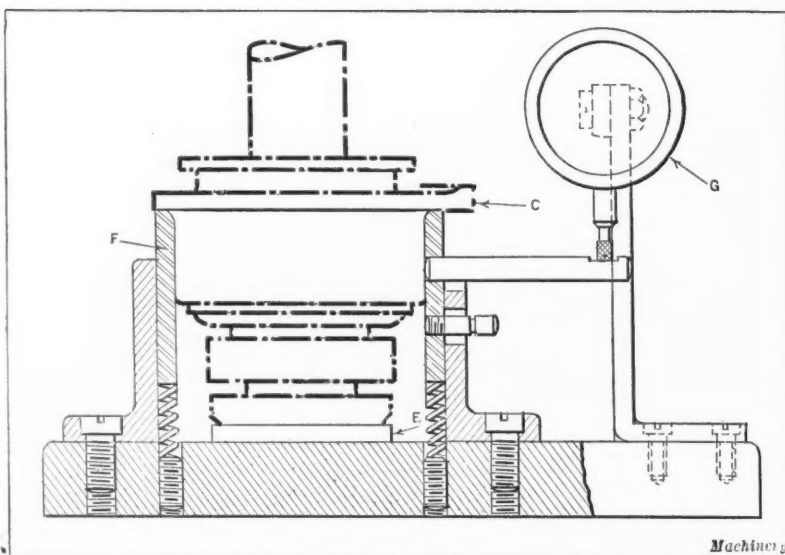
Cross-sectional View of the Fixture illustrated in Fig. 2
